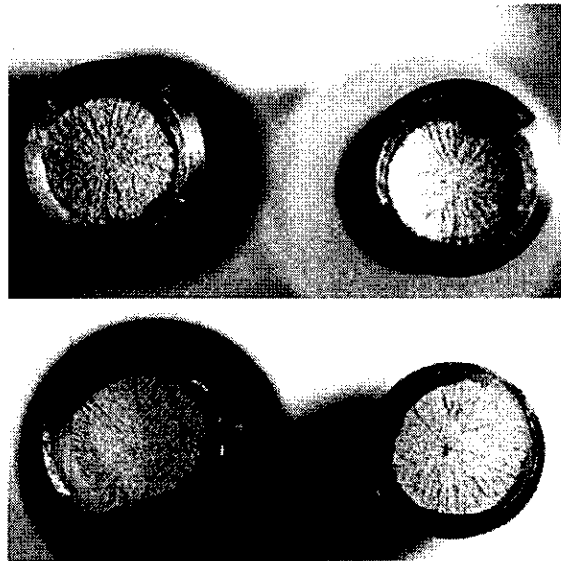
The fracture surfaces of the failed bolt.
